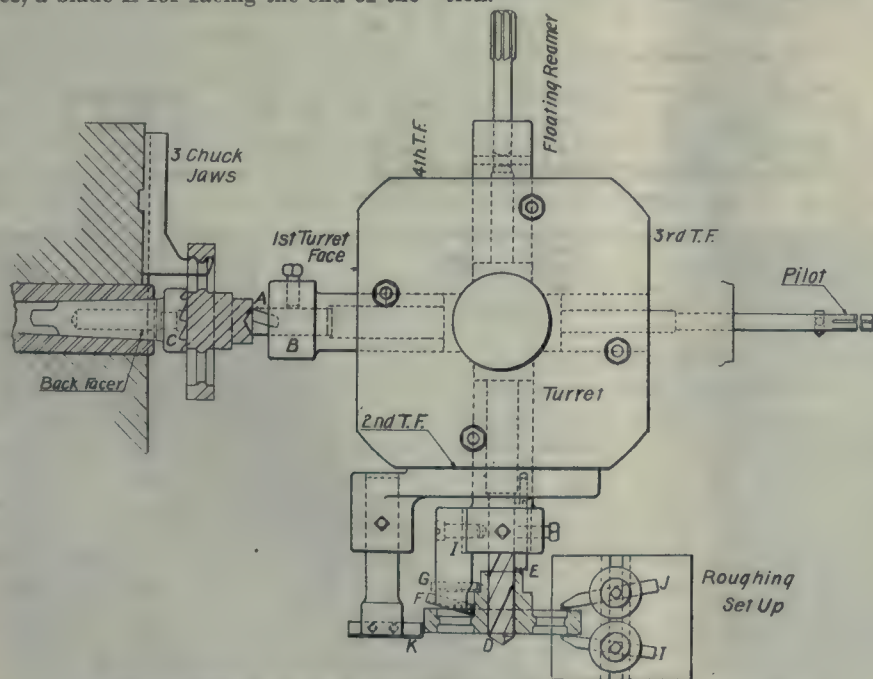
SET-UP FOR ROUGHING AND FINISHING GEAR BLANK.
